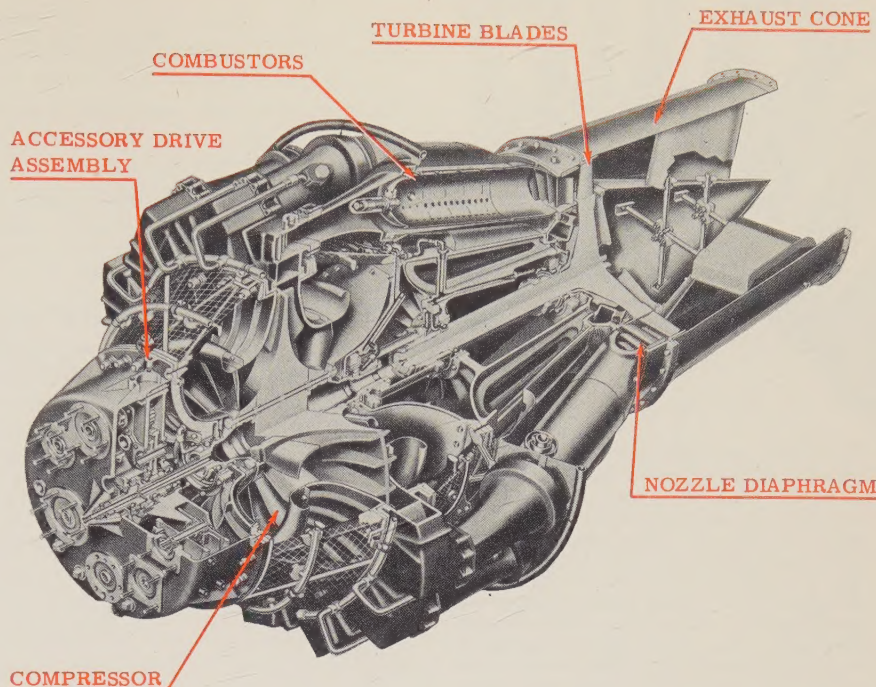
This cutaway view of the Allison J33 turbo-jet engine shows the five major sections: accessory drive assembly, compressor, combustors, turbine unit (including nozzle diaphragms), and exhaust cone. The compressor raises the inlet air pressure and discharges the air into the 14 combustion chambers arranged symmetrically around the engine. The fuel enters the combustion chambers, is mixed with air, and burned. The exhaust gases leave the combustion chamber through a nozzle diaphragm, strike the turbine blades, and emerge through the exhaust cone. The turbine furnishes the drive power for the compressor and accessories.
